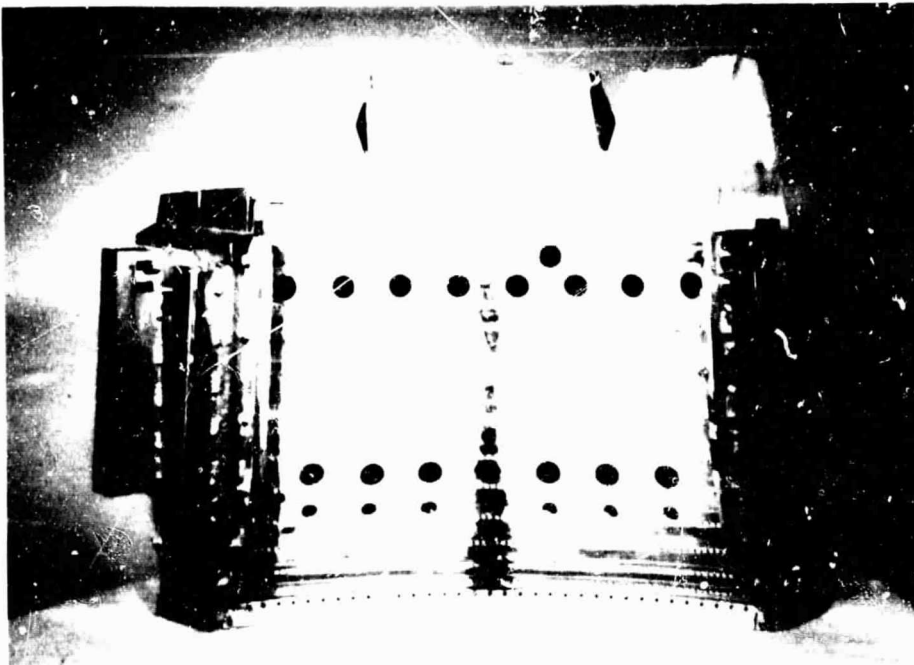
Inner Liner Side of JT9D Bulkhead Combustor Sector
